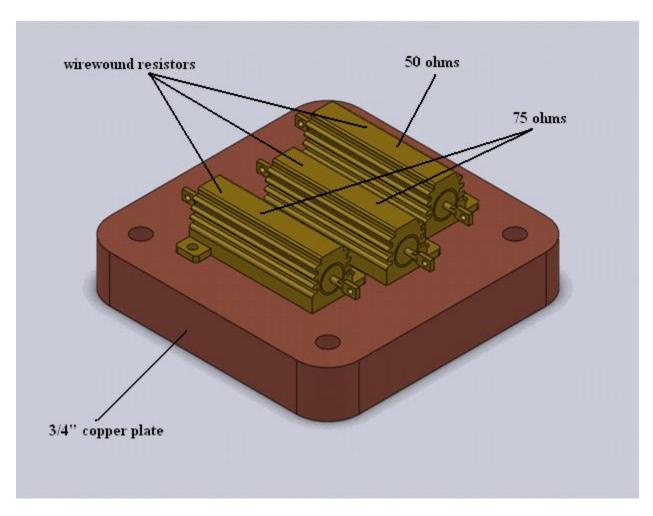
Heater Plate with wire wound heaters attached. Produced with Solidworks.
